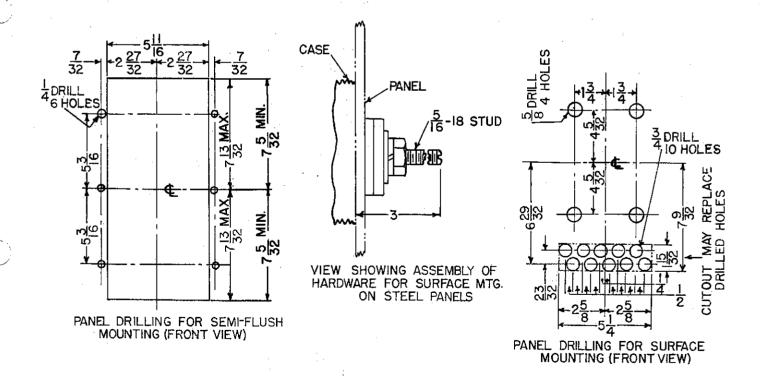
(6209273-2) Outline And Panel Drilling Dimensions Diagram For Type CEB12C Relay
